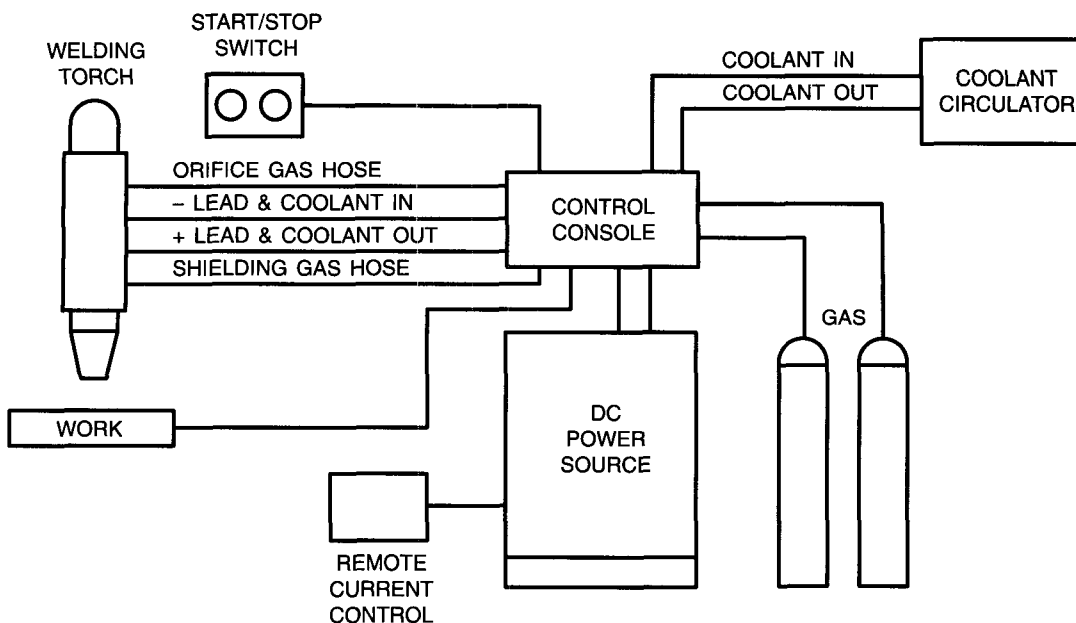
Typical Equipment for Plasma Arc Welding
